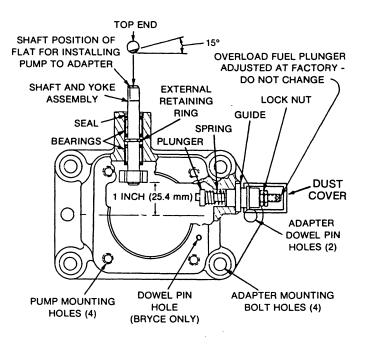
INJECTION PUMP ADAPTER ASSEMBLY
